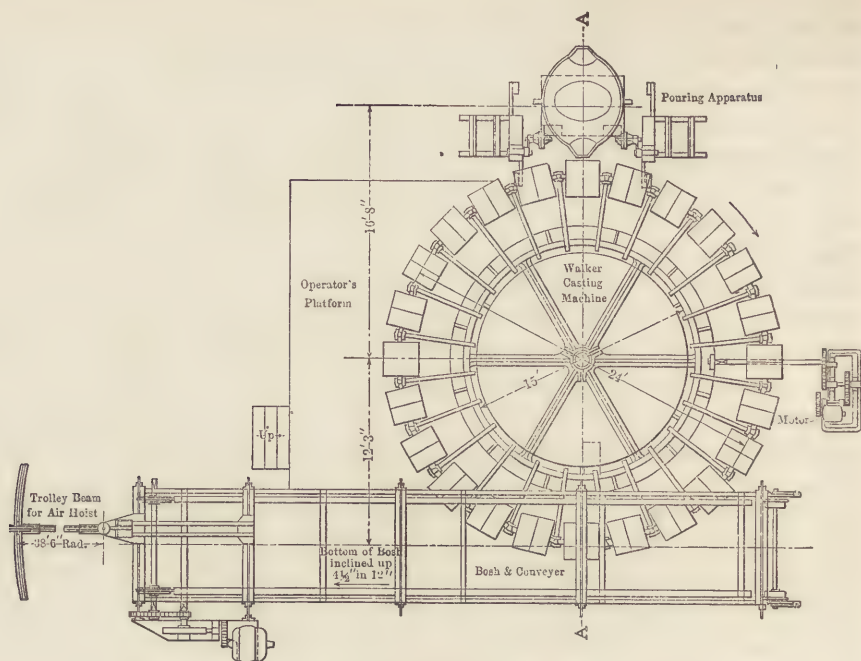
PLAN OF CASTING MACHINE FOR CONVERTER COPPER.
